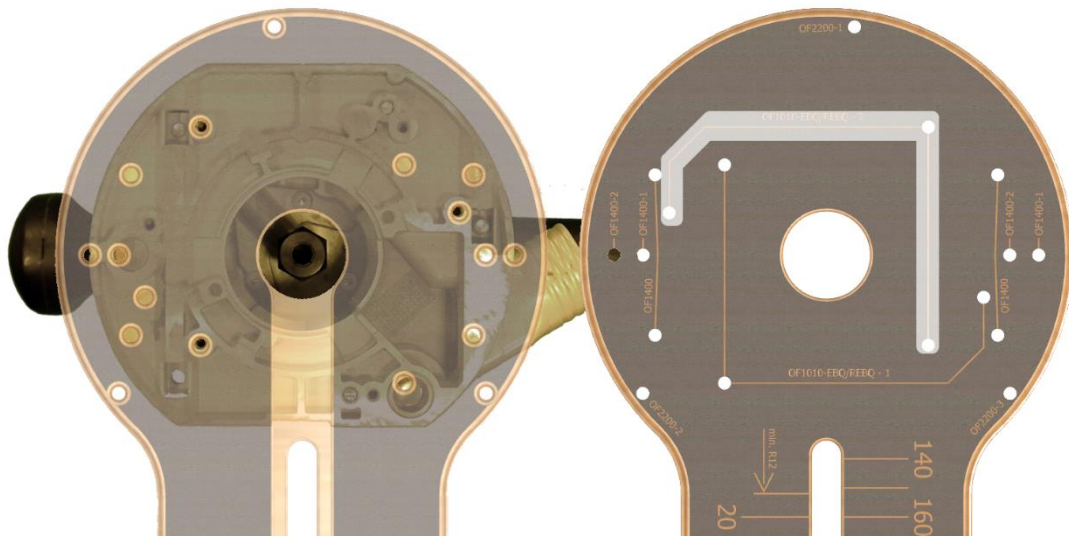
Mounting holes 2 suitable for Festool OF1010-REB
